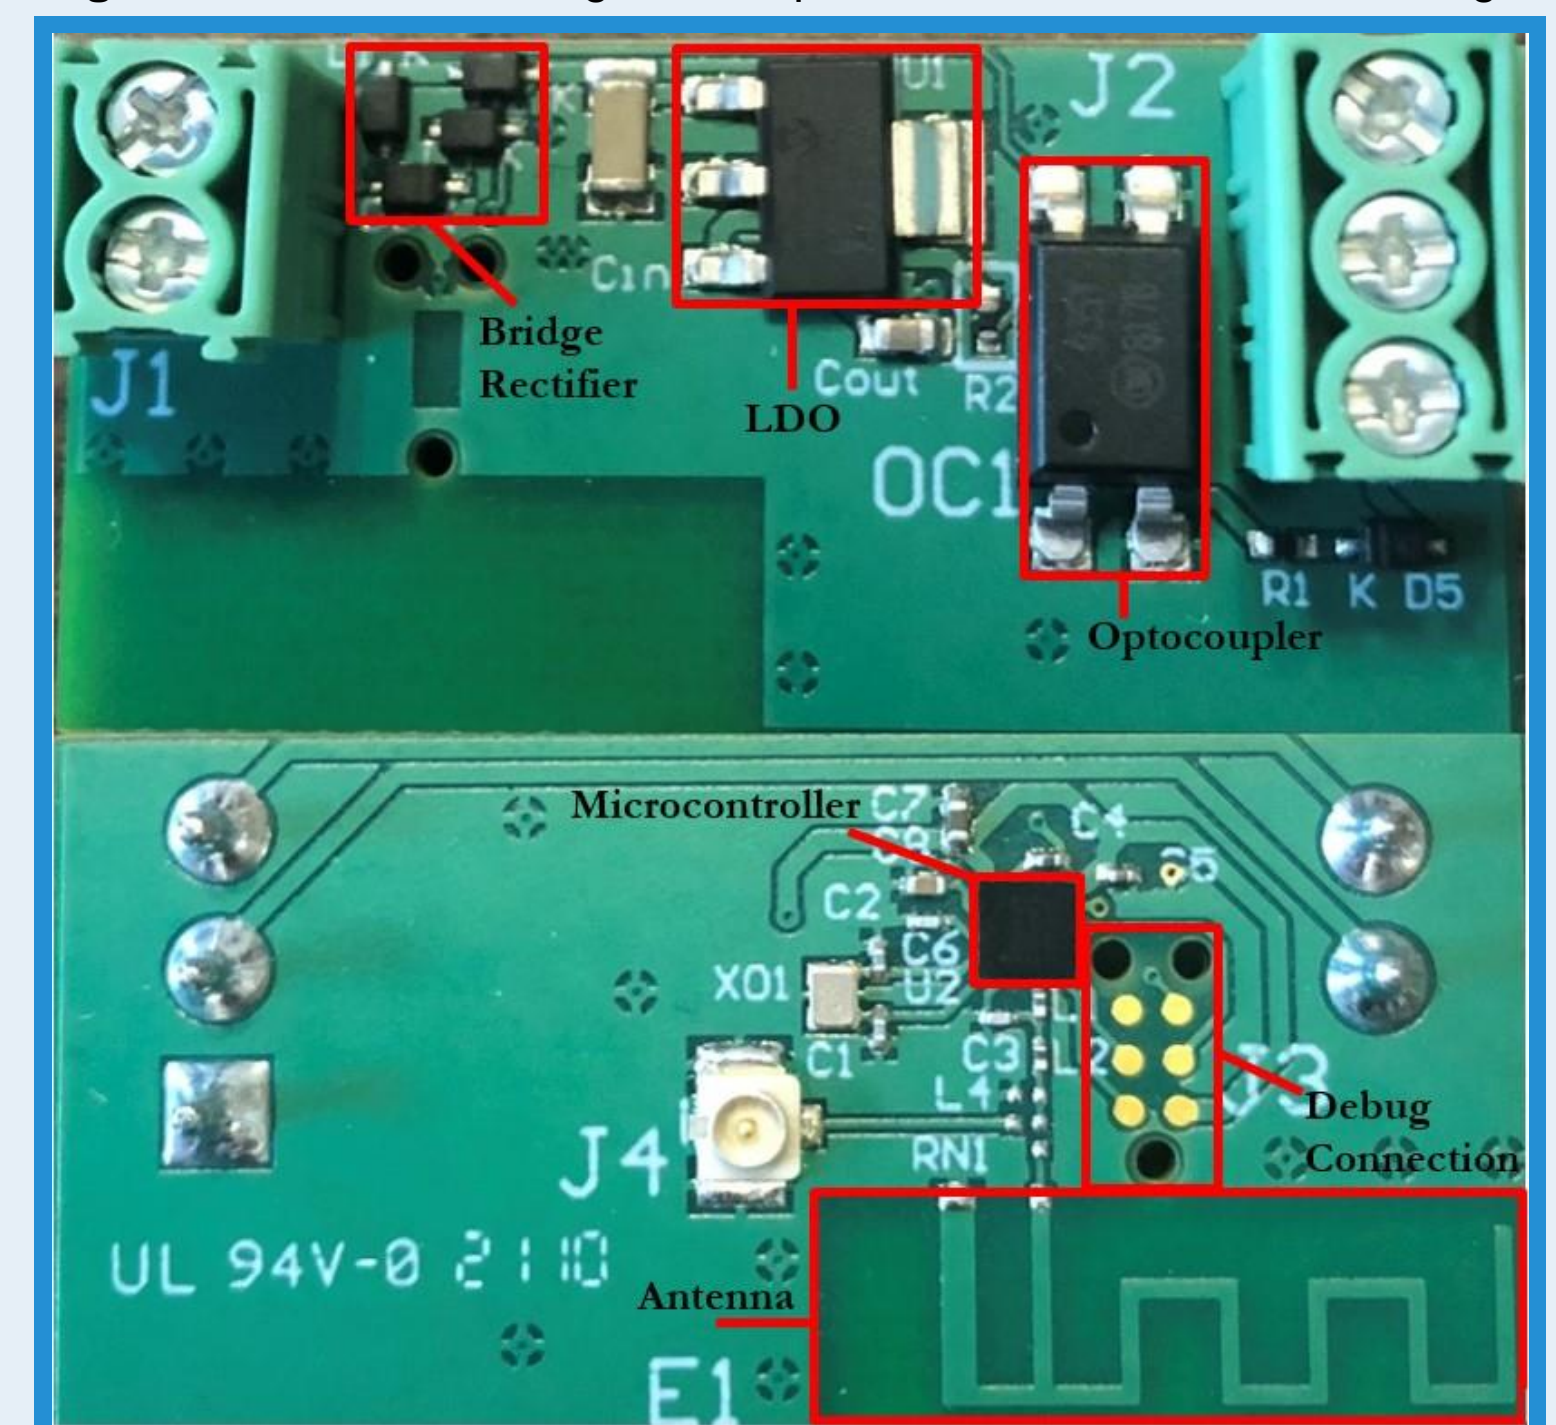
PCB prototype. Top layer: connectors, power management, and optocoupler circuits. Bottom layer: MCU, antenna, and debug connector.
